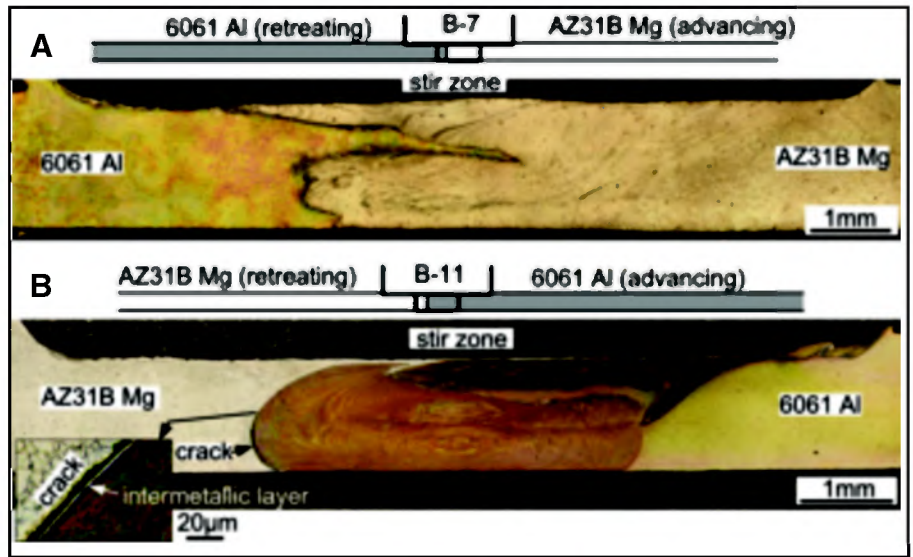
Transverse cross sections of welds in butt joints. A — Weld B-7; B — weld B-11.
